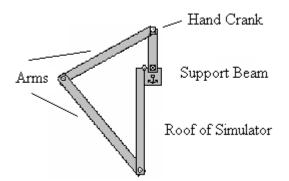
Schematic of Four-Bar Pulley System (Roof Closed)
